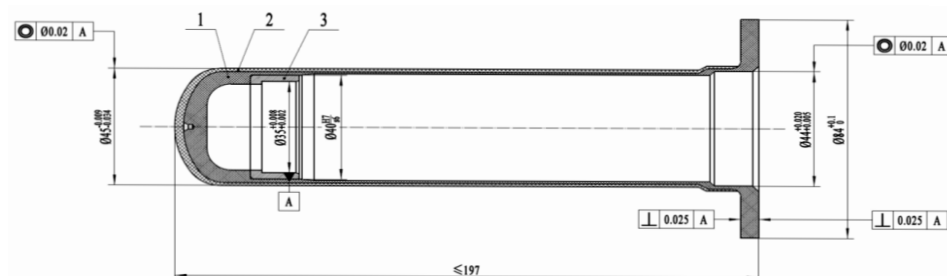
Engineering drawing of the PEEK–CFRP composite stator shielding sleeve (dimensions in mm). Layers 1, 2, 3 denote the CFRP overwrap, PEEK liner, and bearing bushing, respectively.
